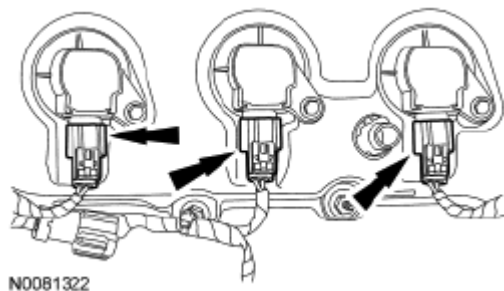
Locating RH Coil-On-Plug Electrical Connectors
